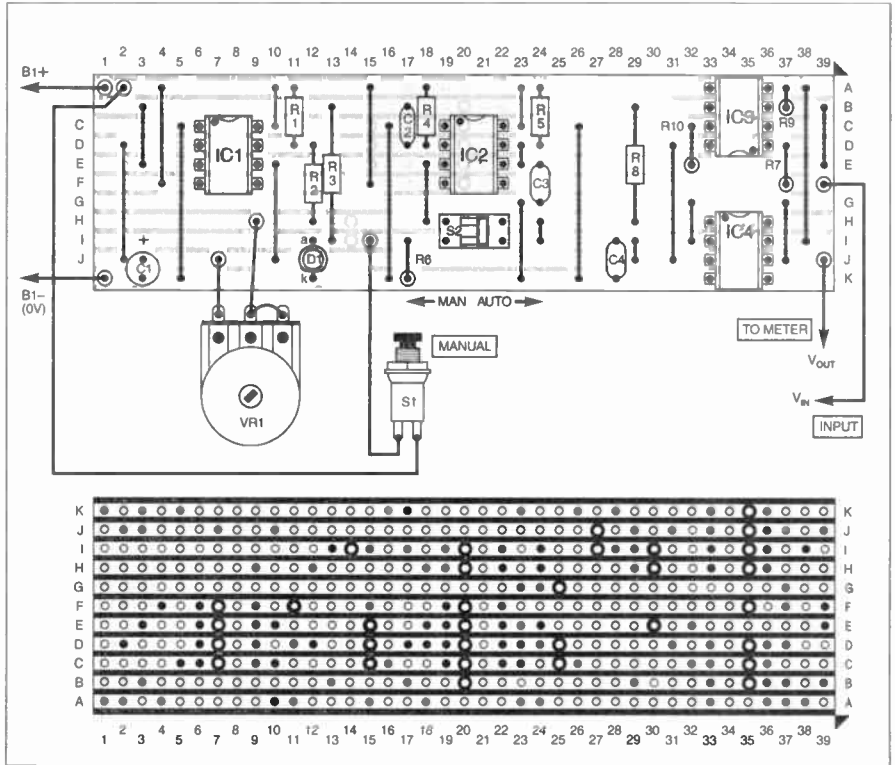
Stripboard component layout, interwiring and details of breaks required in the underside copper tracks.
